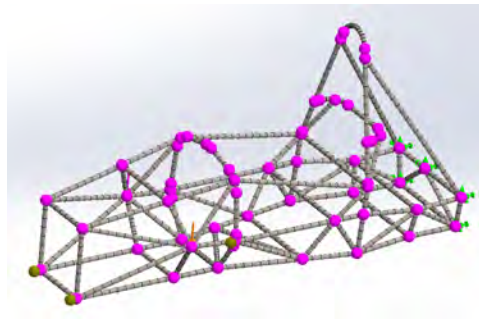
Mesh, joints, forces and fixtures for Static test 1
